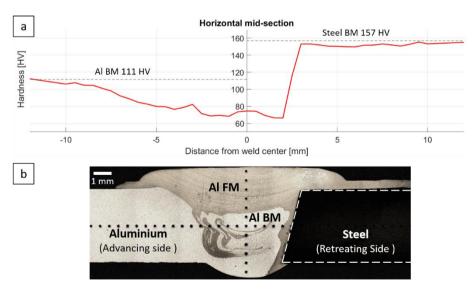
(a) Measured hardness profile along the horizontal mid-section of the dissimilar AA6082-T6 and S355 HYB-welded joint; (b) Optical macrograph of the joint cross section. The material flow pattern of the aluminum base and filler material (Al BM and Al FM) are clearly visible.
